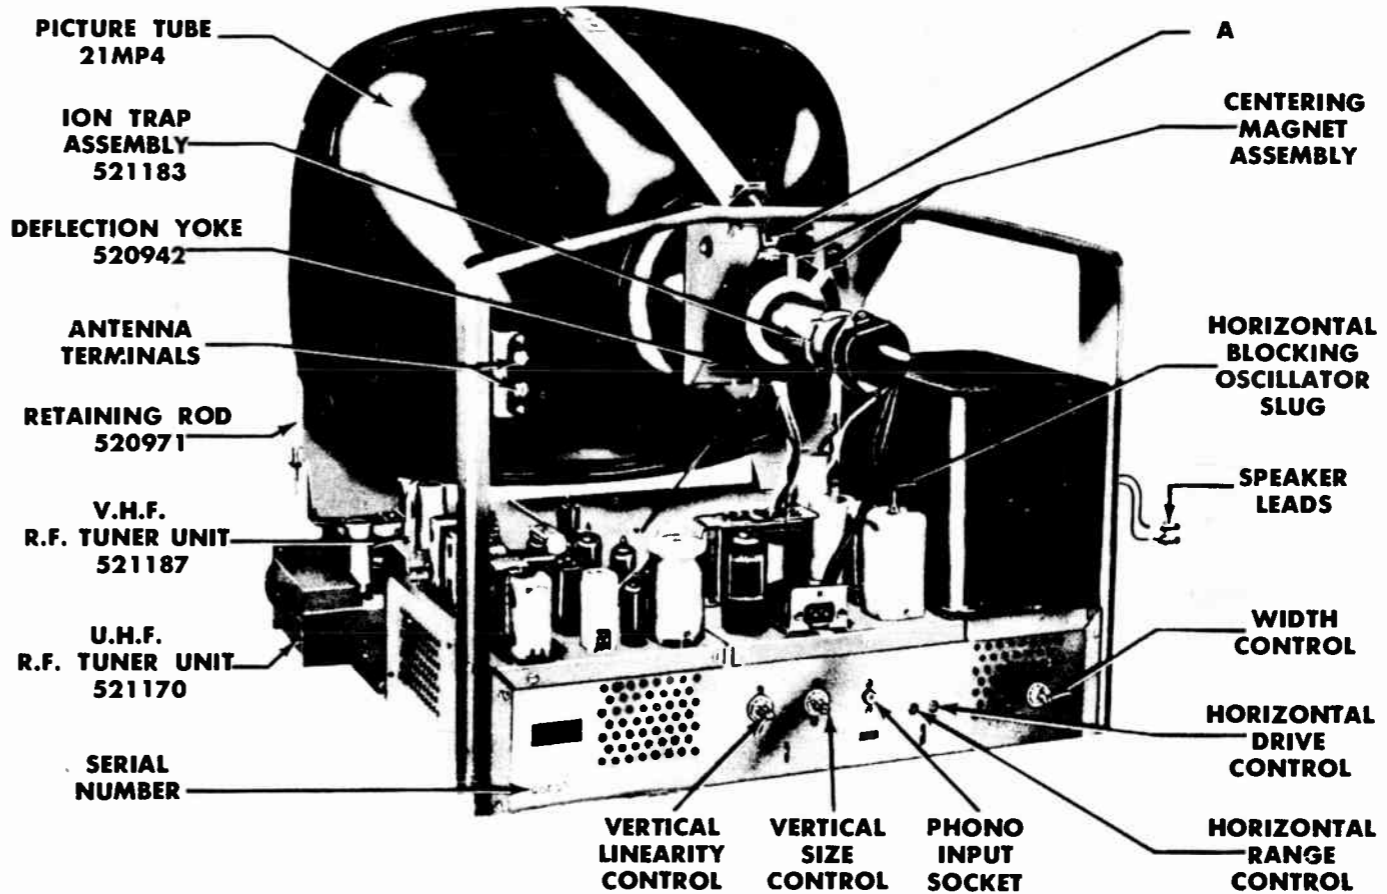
CHASSIS AND PICTURE TUBE ASSEMBLY
